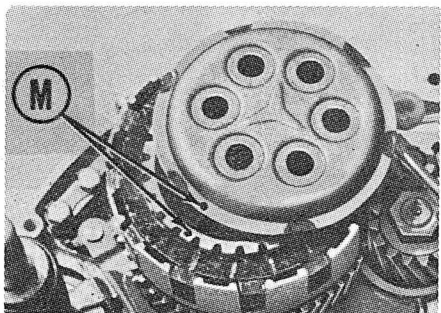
Marks (M) should be aligned when installing the clutch pressure plate.
